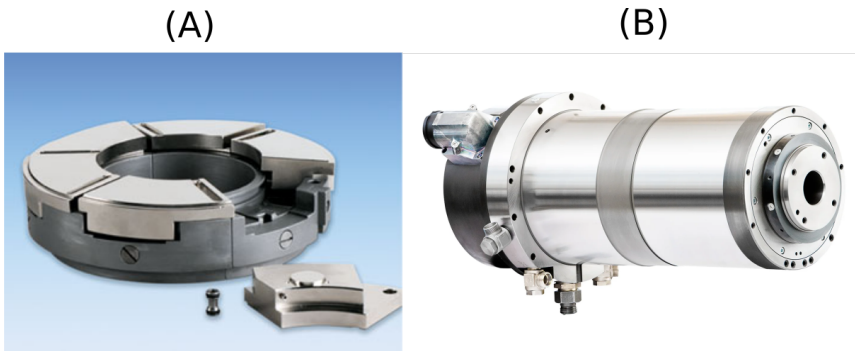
(A) A [Kingsbury](#) Tilting pad hydrodynamic thrust bearing. (B) A hydrostatic journal bearing by [Zollern](#).
